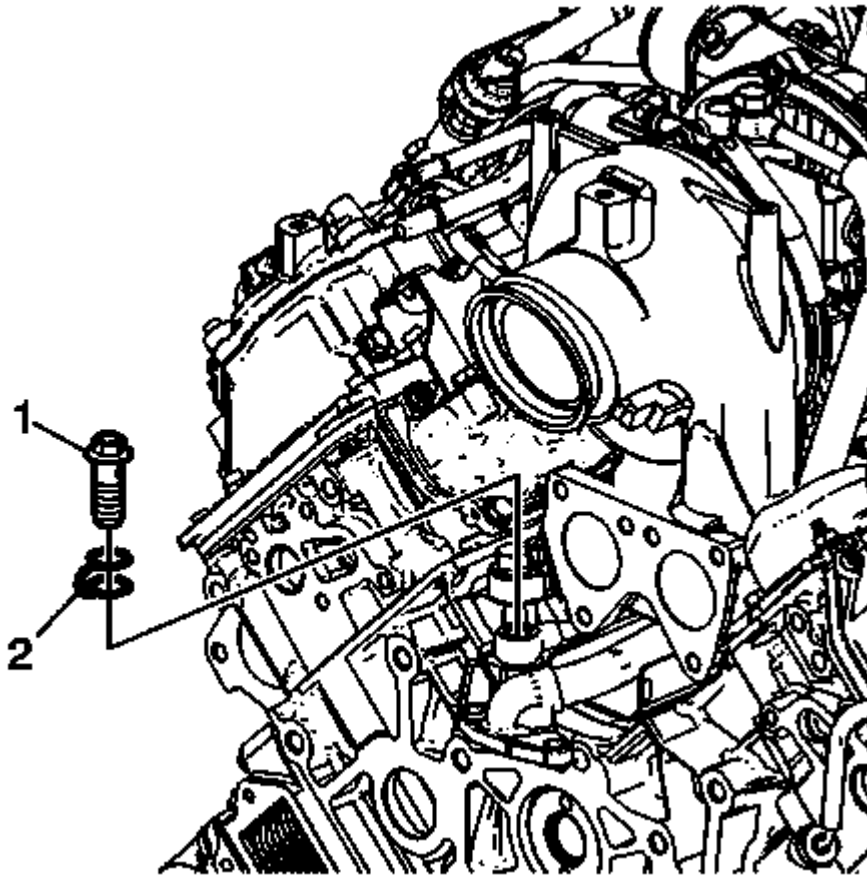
View Of Turbocharger Oil Feed Pipe Eye Bolt & Washer
